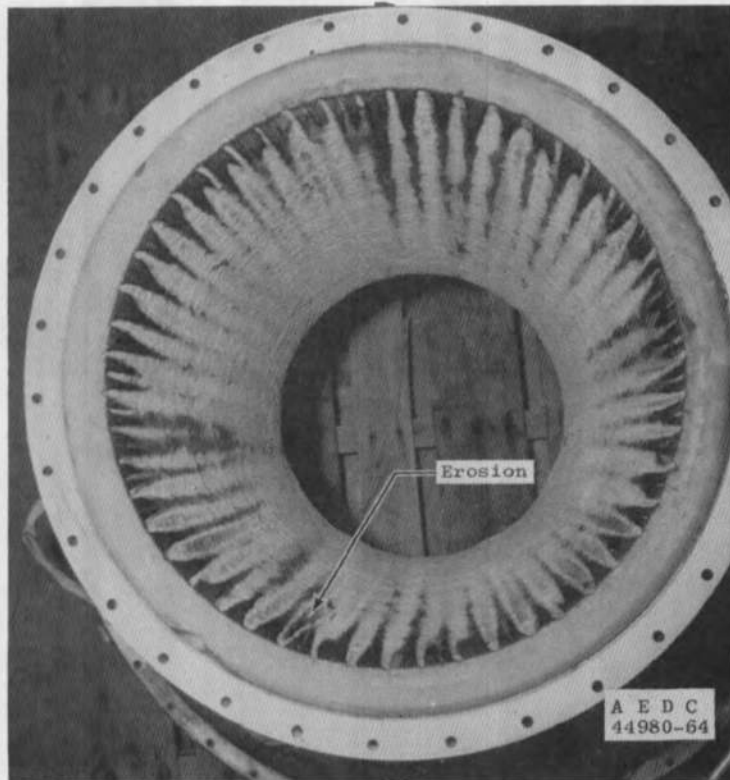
Combustion Chamber Damage on Engine Assembly No. 2
